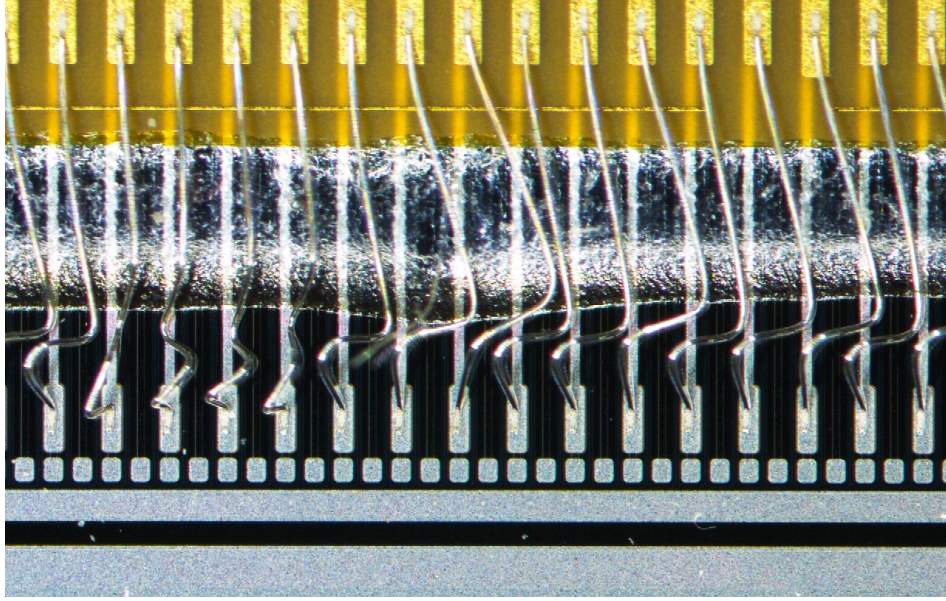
Damaged and bent wire bonds between the sensor and a flexible PCB on class B ladder. Glue spread out under flexible PCB is normal.
